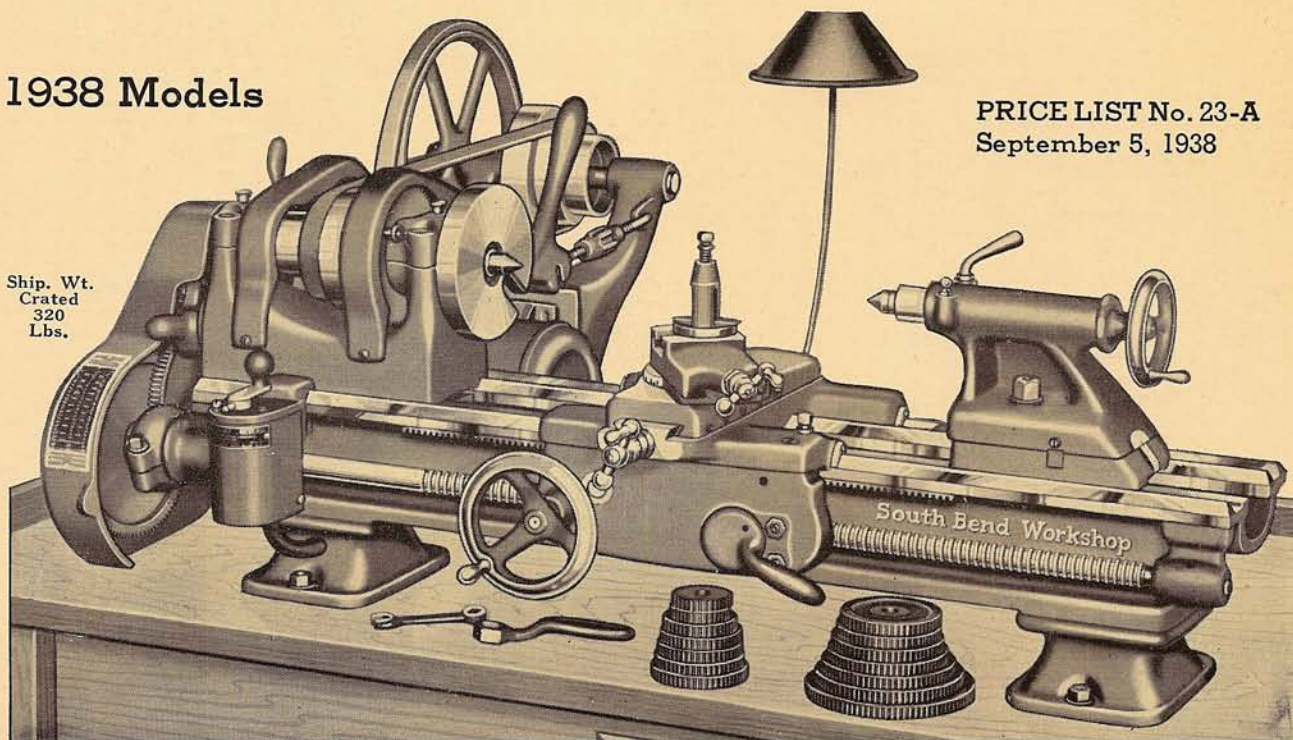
Cat. No. 415-YA, 9" x 3' "Workshop" South Bend Precision Bench Lathe with Adjustable Horizontal Motor Drive, Motor, Switch and Regular Lathe Equipment, but less Bench.....\$117.00
